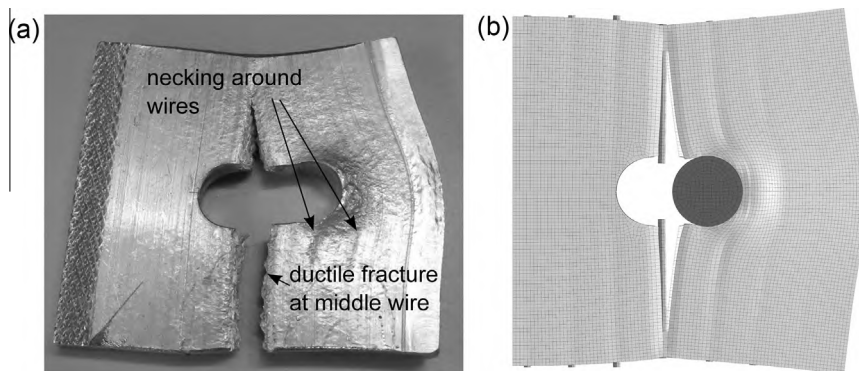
(a) Experimental and (b) simulated fracture for a bolt-pull-out test perpendicular to wire direction of SWRA.
